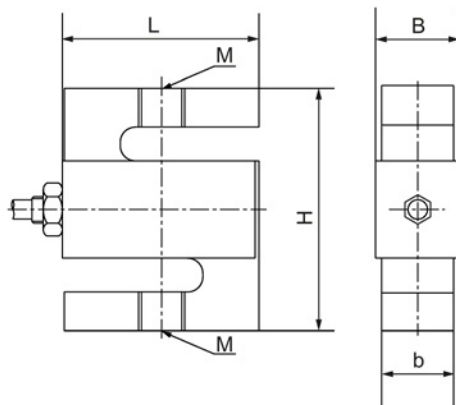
SIWAREX WL250 ST-S SA dimension drawing
